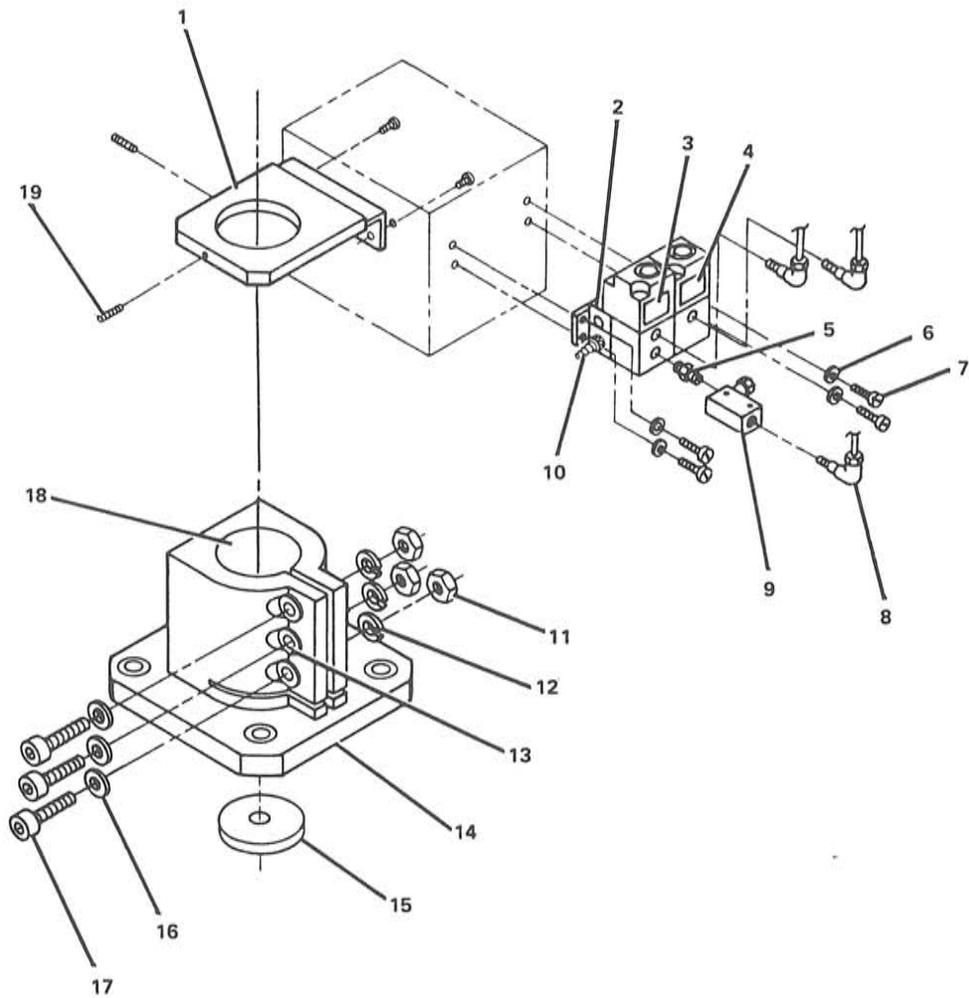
BASE ASSEMBLY. SEE LIST 5.
